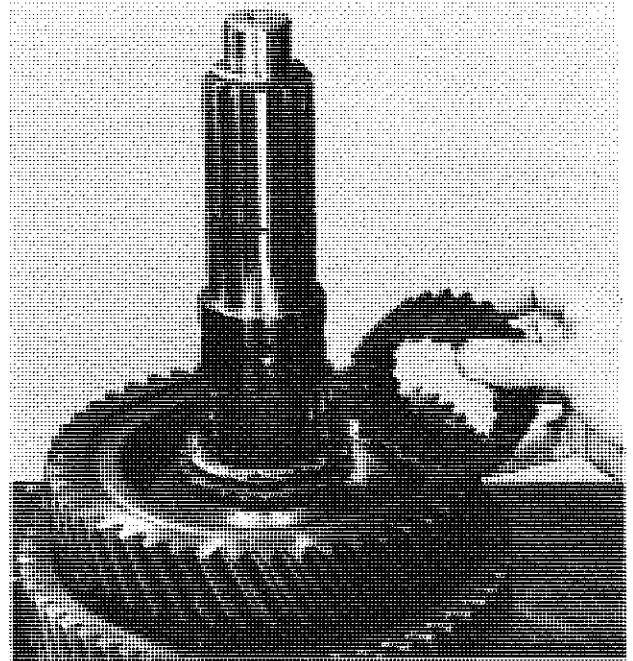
Removing 2nd-3rd Speed Clutch Gear
